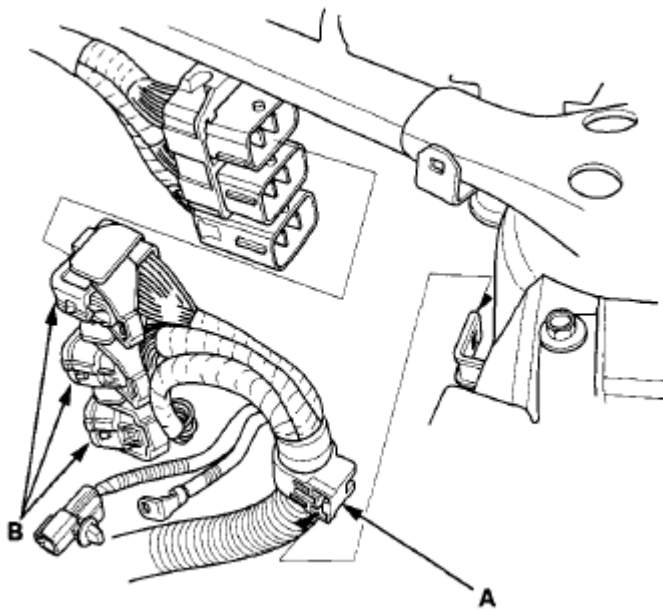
Disconnecting Engine Wire Harness Connectors On Left Side Of Engine Compartment
